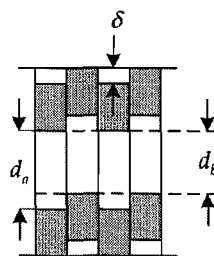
Stator lamination dimensions and corresponding tolerances
